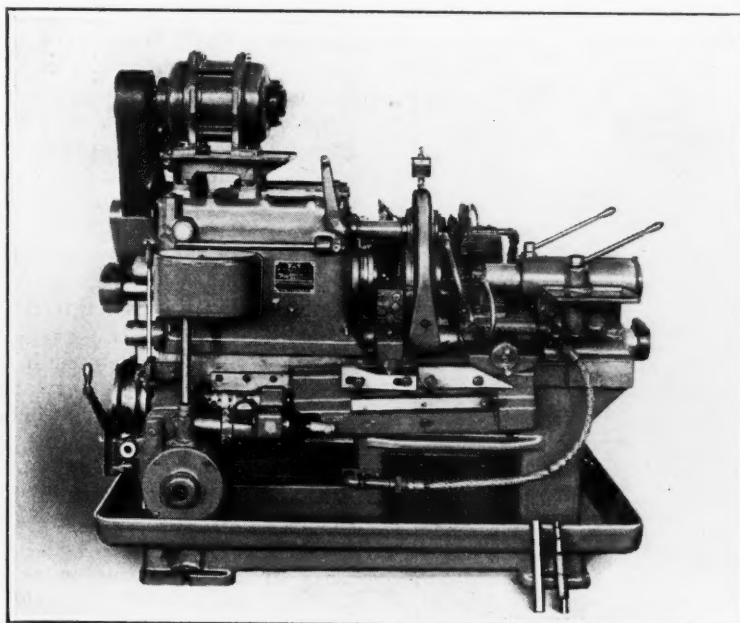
Fay Automatic Lathe of Smaller Size, with Chip Guards Removed
